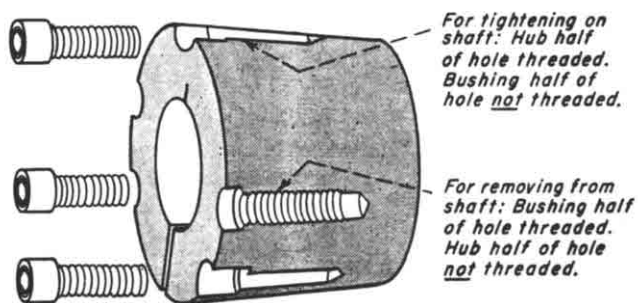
This split bushing has a tapered outer diameter. Split holes in the bushing align with split holes in the hub. For tightening, the hub half of the hole is tapped, and the bushing half is un-tapped. A screw pulls the bushing into the hub as it is tightened, and it is removed by reversing the procedure.
